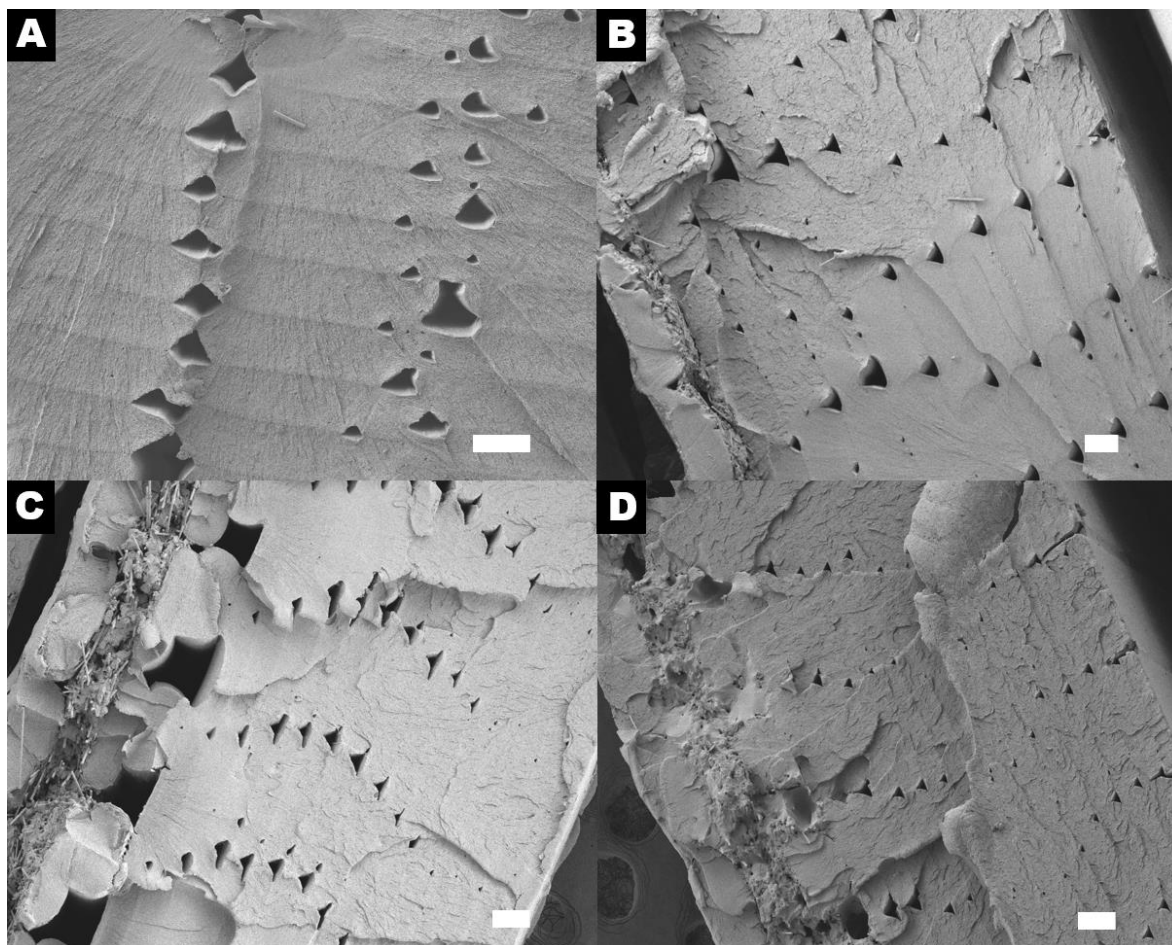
Fracture surfaces of as-printed ABS (A) and post-processed composites with 0.1 mm (B), 0.2 mm (C) and 0.3 mm (D) HBPs. The size of the scalebar is 100 μm.
